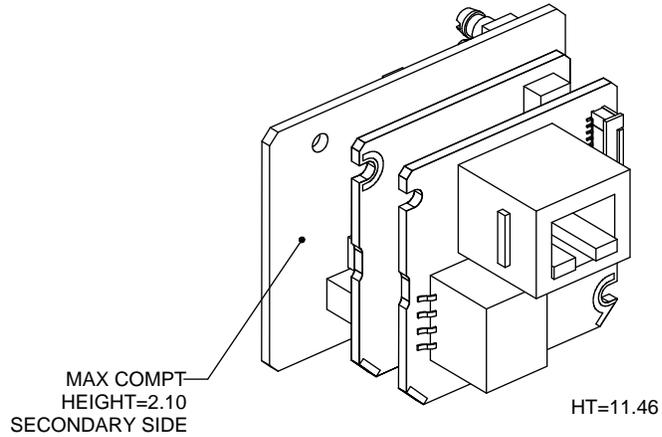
OEM Board Set No GPIO Connector: Component Height Adapter Board
